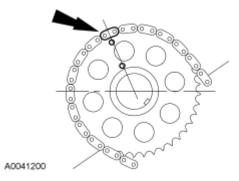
Aligning Copper (Marked) Link With Timing Mark On Camshaft Sprocket Courtesy of FORD MOTOR CO.
